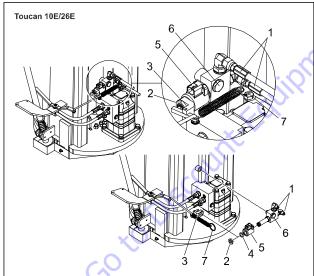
Mast Cylinder Holding Valve - Removal/ Installation
